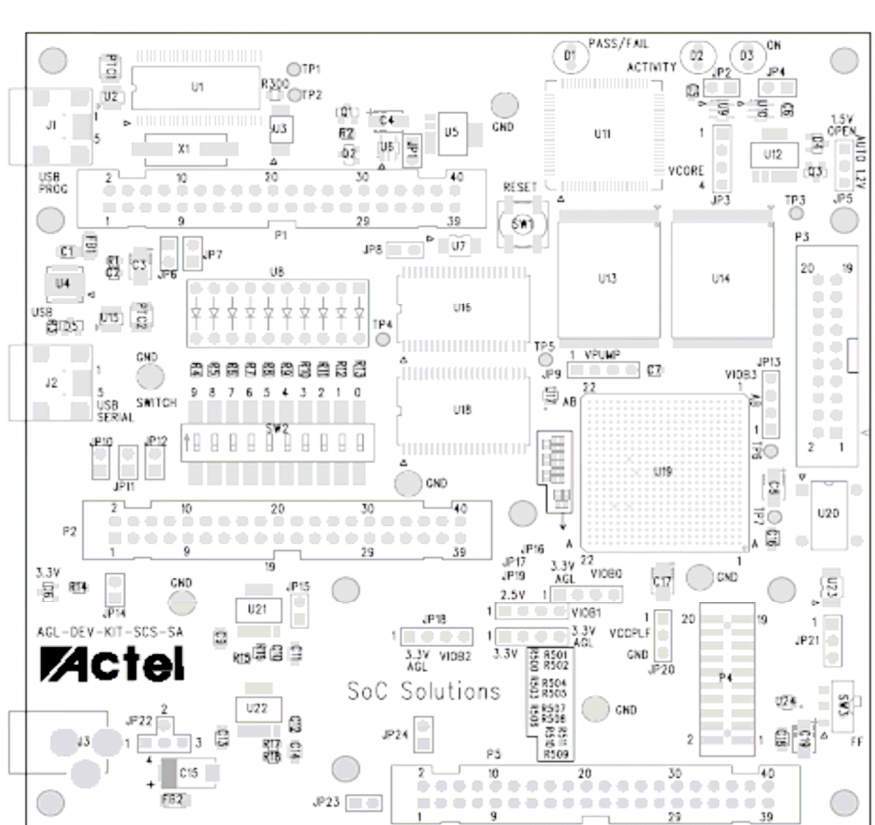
M1AGL Development Board Top Assembly Drawing
